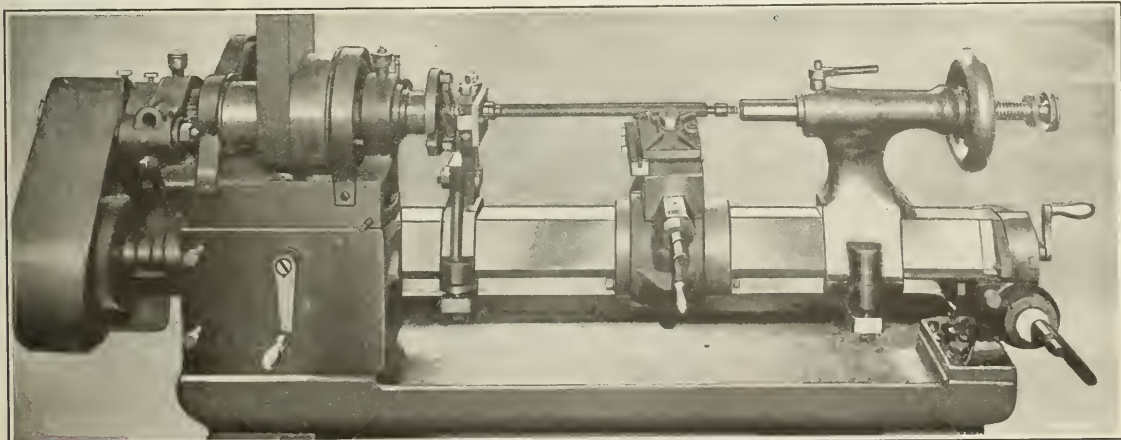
Lathe on which Preliminary Screw Cutting Operation is performed. Machine was built by W. Von Pittler, Leipsic, Germany, but has been furnished with Special Lead-screw, Gearing and Auxiliary Equipment
